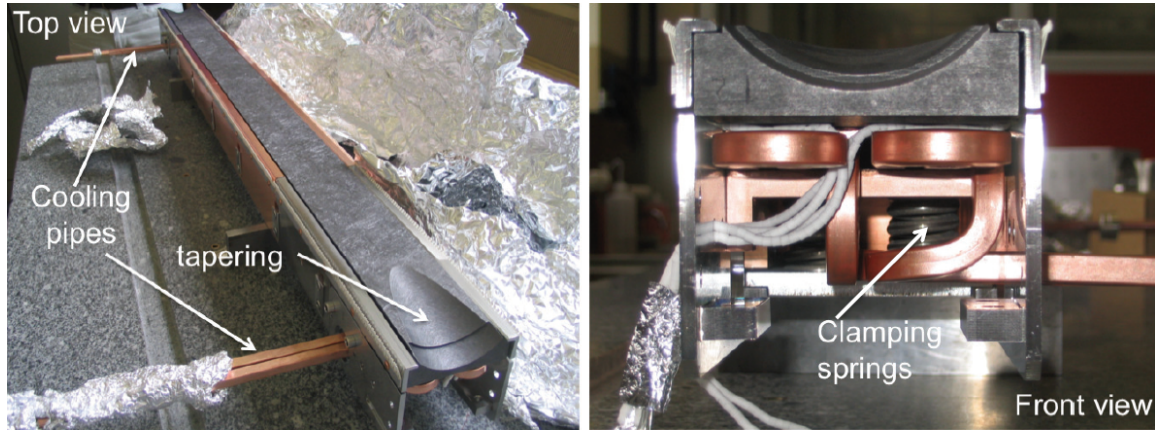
Top and front view of a secondary collimator jaw assembly [8].
